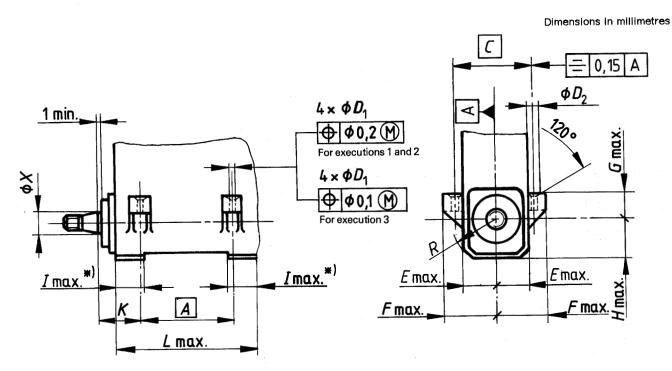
Cradle-mounted in-line fuel Injection pump — Type 2
